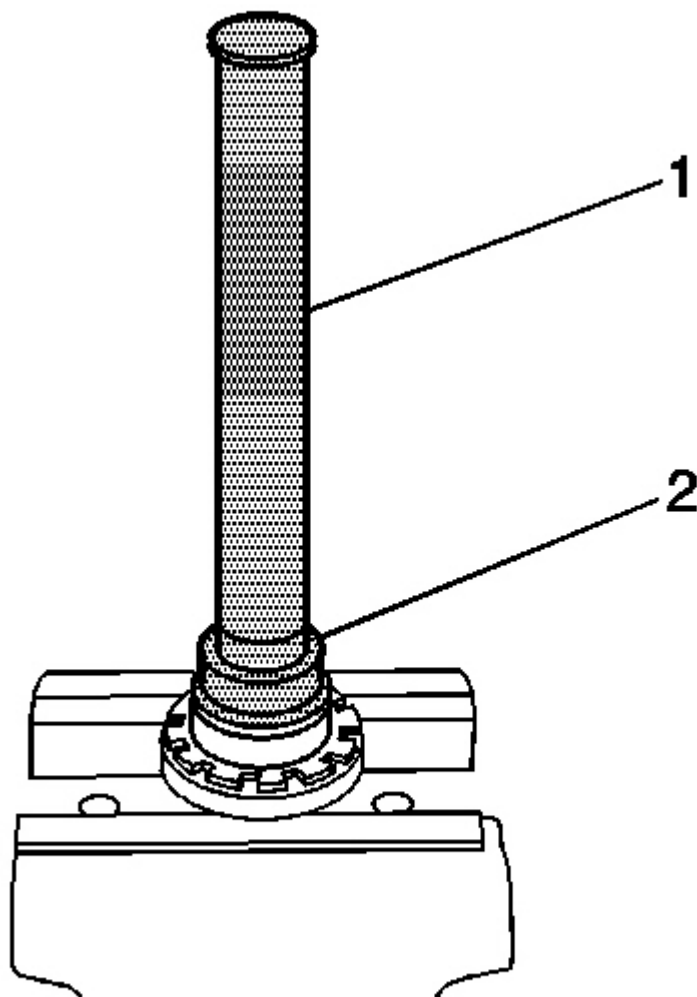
Universal Driver Handle - 3/4 In - 10 And Differential Bearing Adjuster Needle Bearing Replacer - LH
